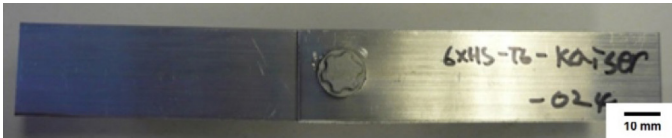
A top view of a lap-shear specimen with a FDS joint without clearance hole.
